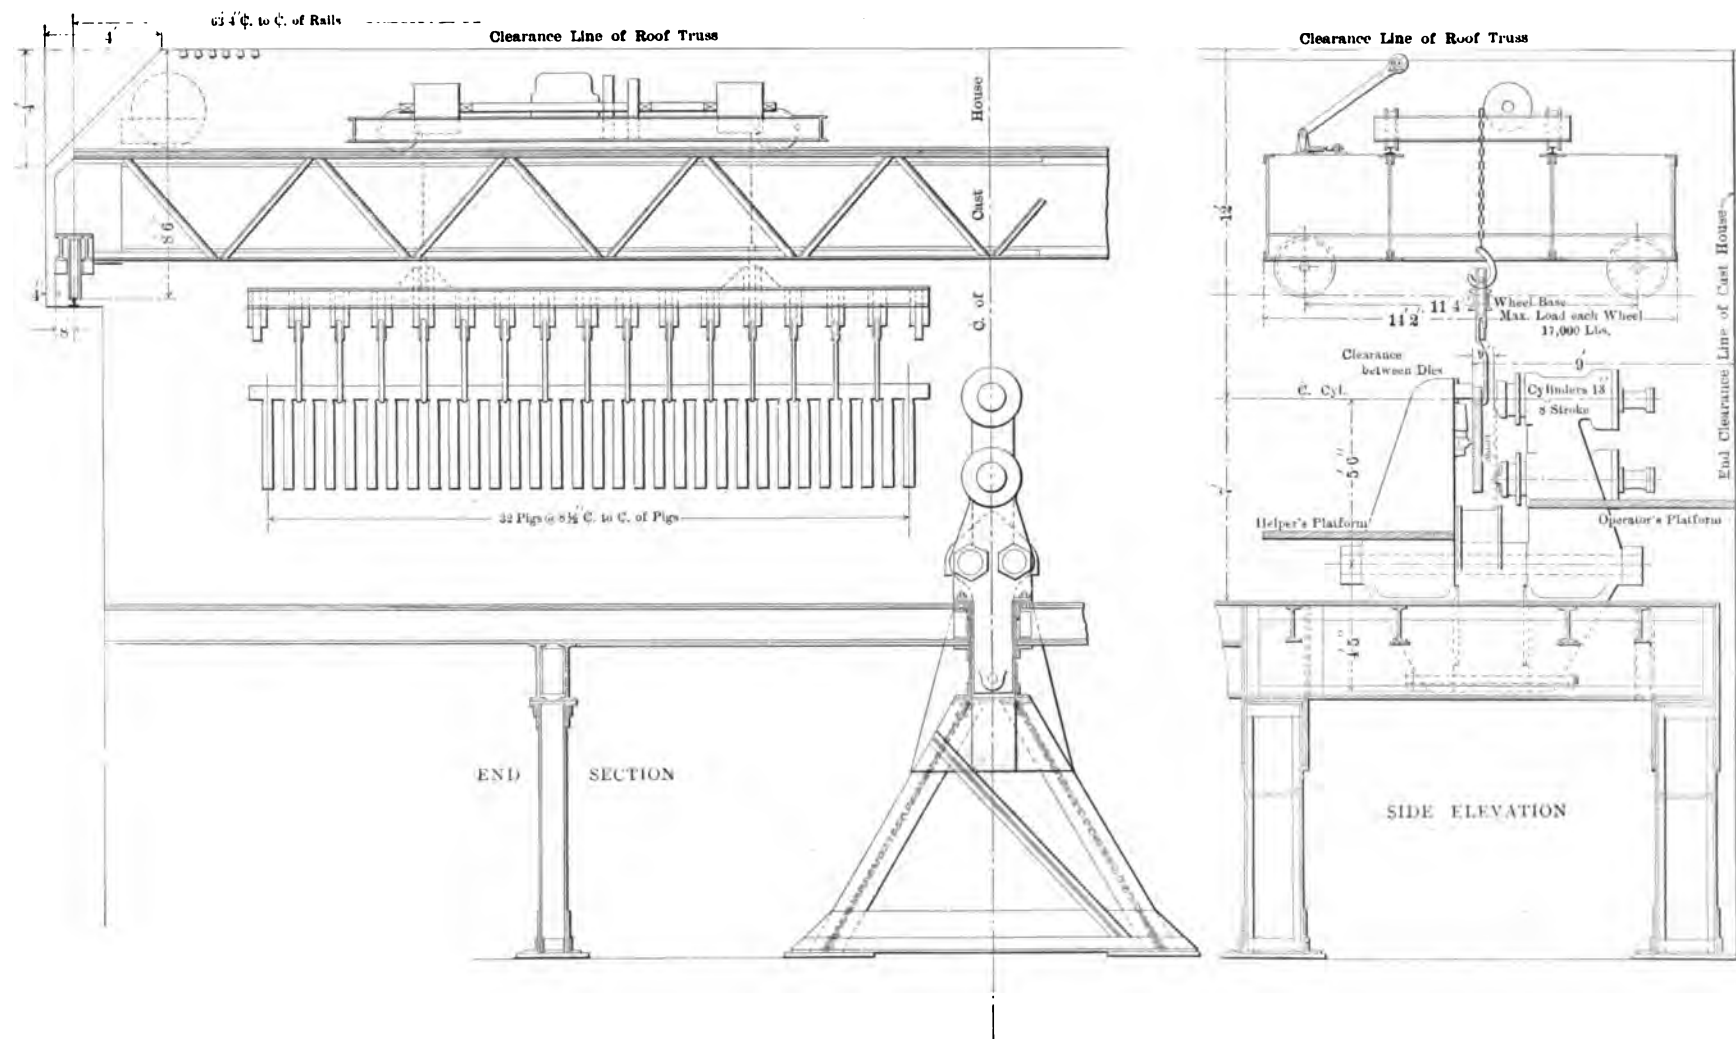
END SECTION AND SIDE ELEVATION OF CAST-HOUSE.
